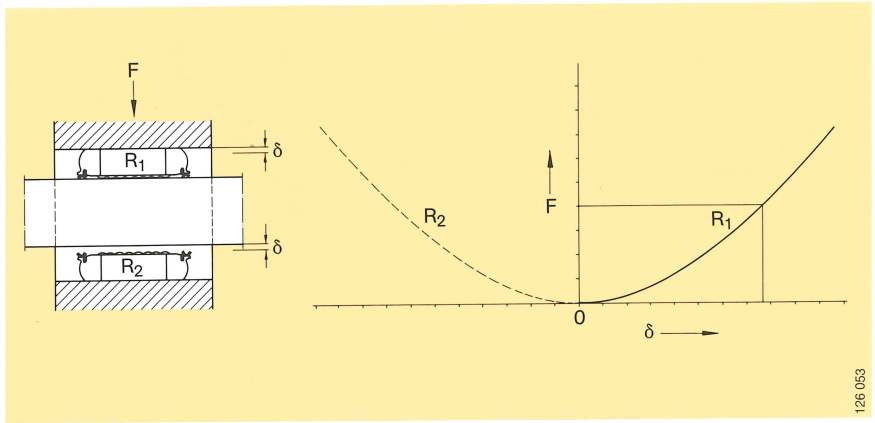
Deflection curve for linear roller bearings assembled clearance-free without preload
